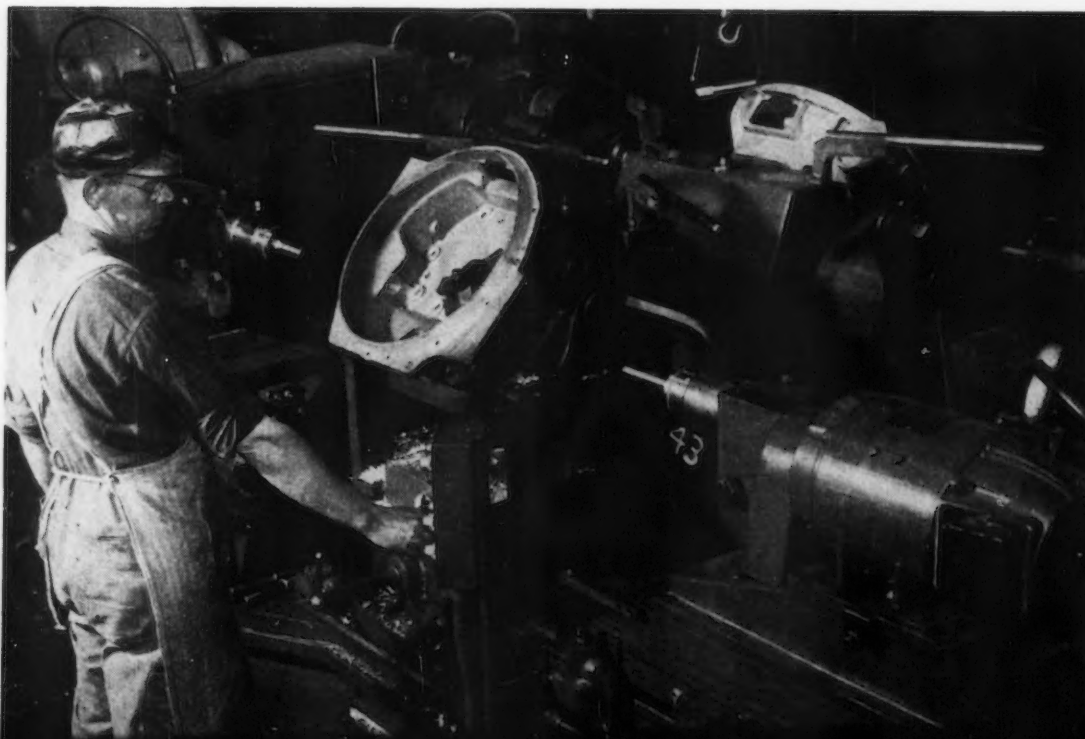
With the parts in position for machining, the operator is about to start the cutting cycle. The operator unloads, loads and indexes the fixture, and then starts the machining cycle. Drilling is done on the far side of the machine and boring on the operator's side.
